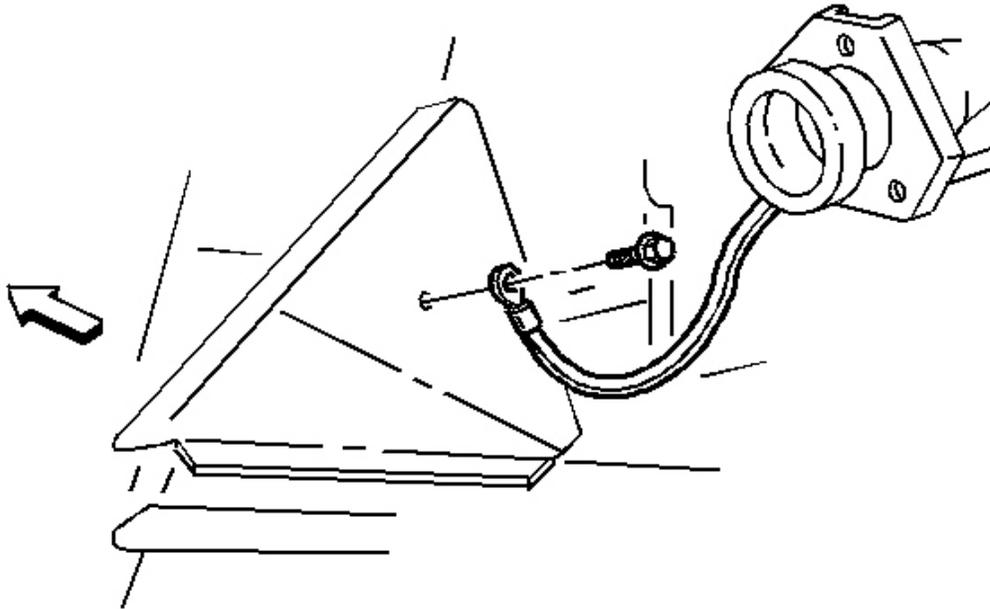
Fuel Filler Pocket Fuel, Tank Fill & Vent Pipe
